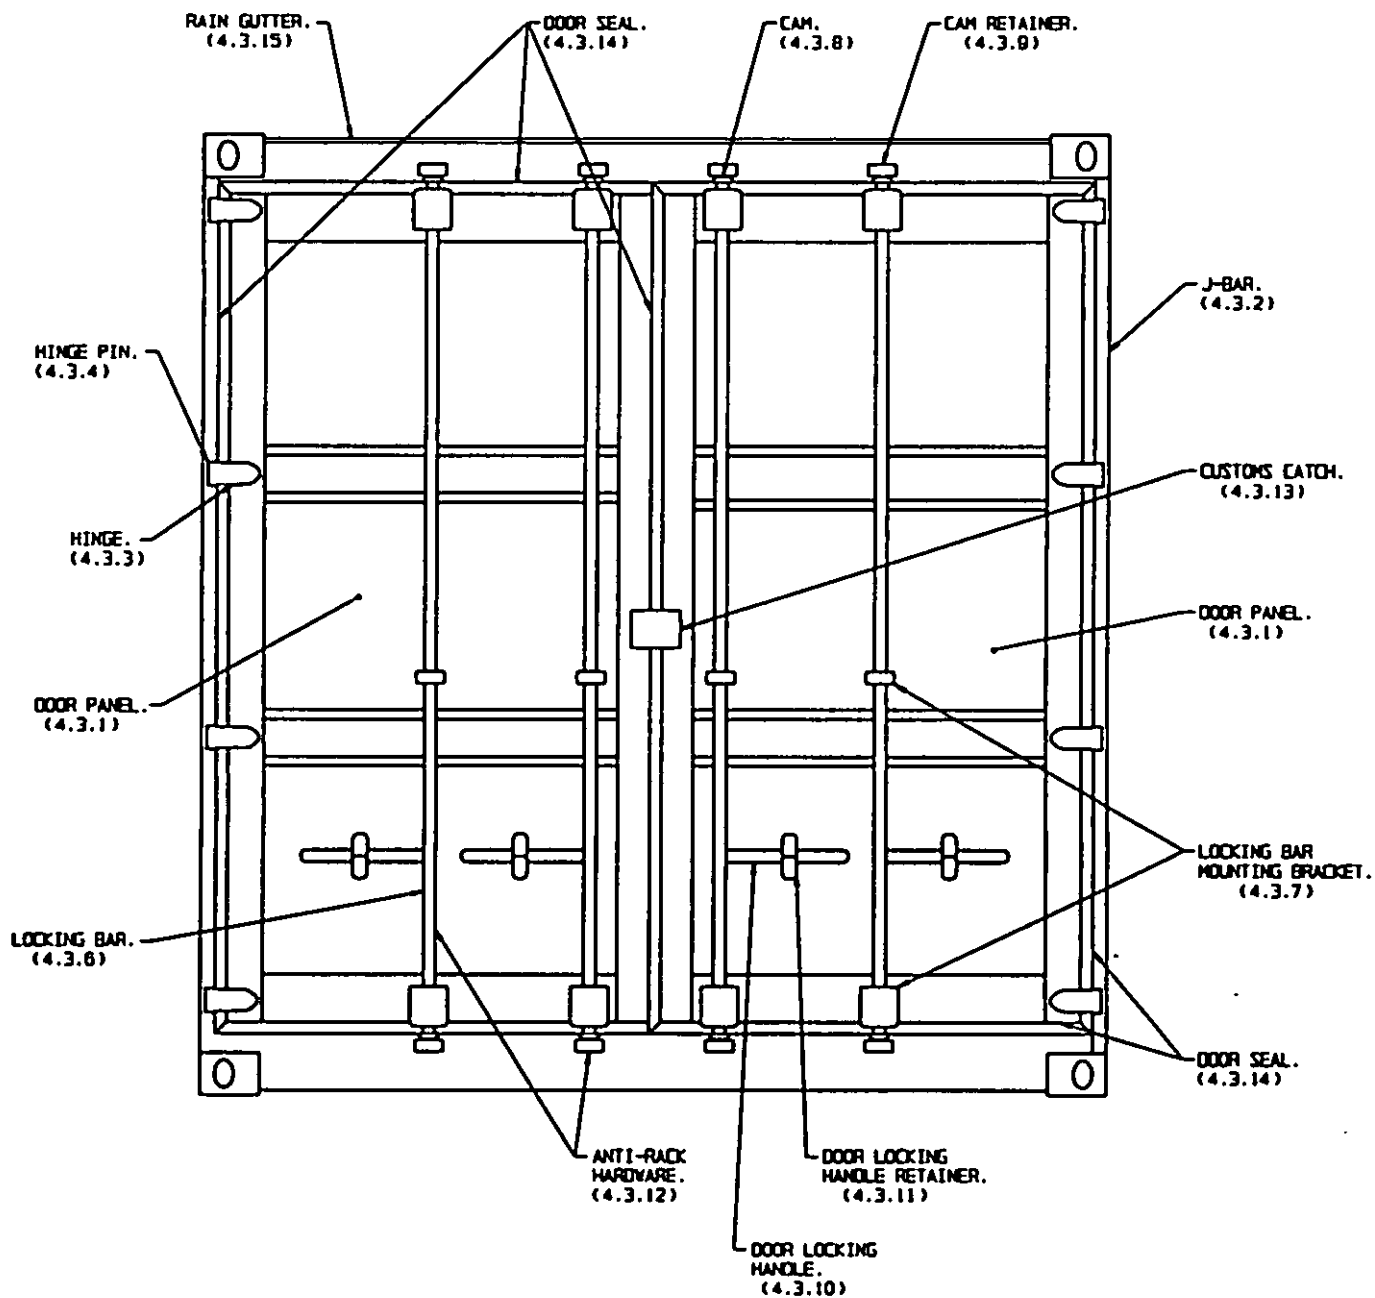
TYPICAL REAR END DOOR ASSEMBLY
